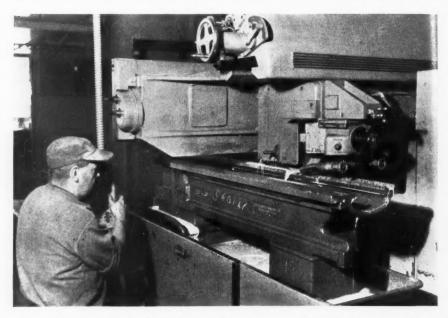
Grinding ways of Hendey lathe on Thompson heavy-duty hydraulic way grinder.
